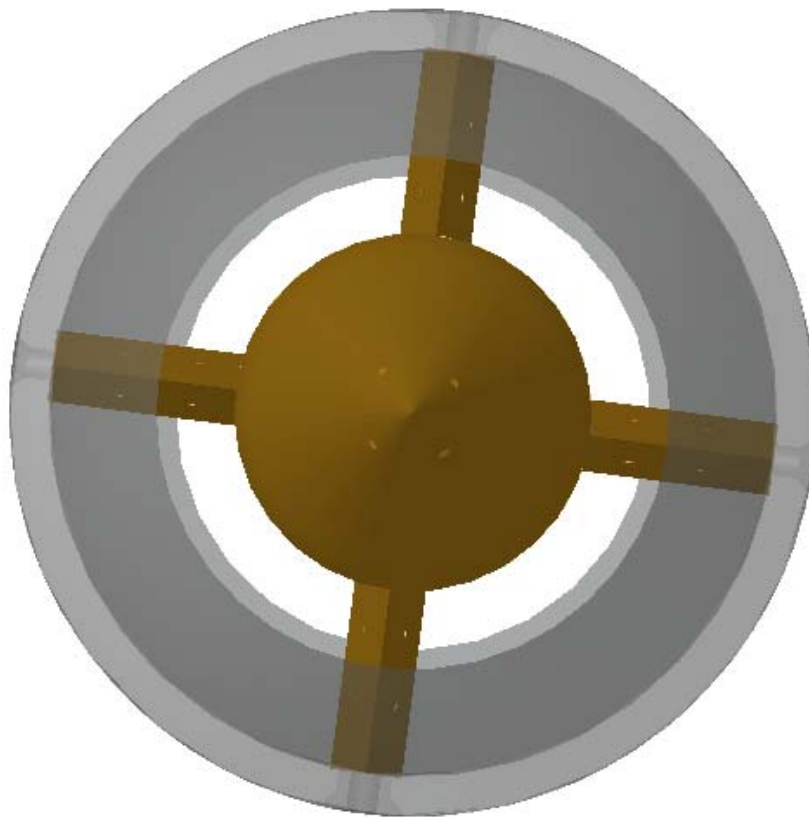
Front view of ramjet showing spacing of fuel injection holes on the inlet cone with respect to the support struts.
